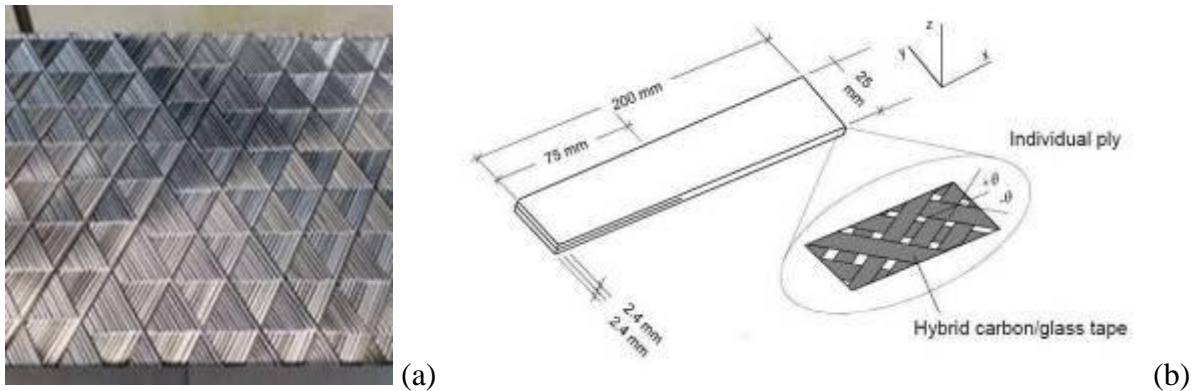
(a) Example of a filament-wound plate from which DCB and ELS specimens were manufactured, (b) geometry of resulting specimens
